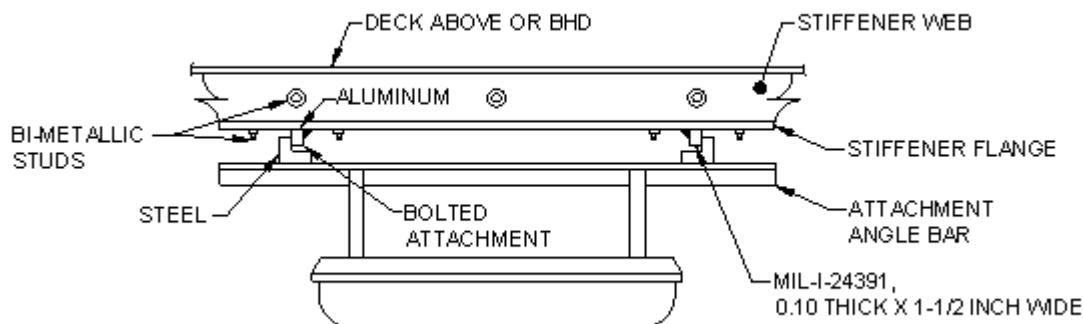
Light or electrical equipment attachment to stiffener in accordance with Detail Y of 803-5184182 (fire insulation removed for clarity).
